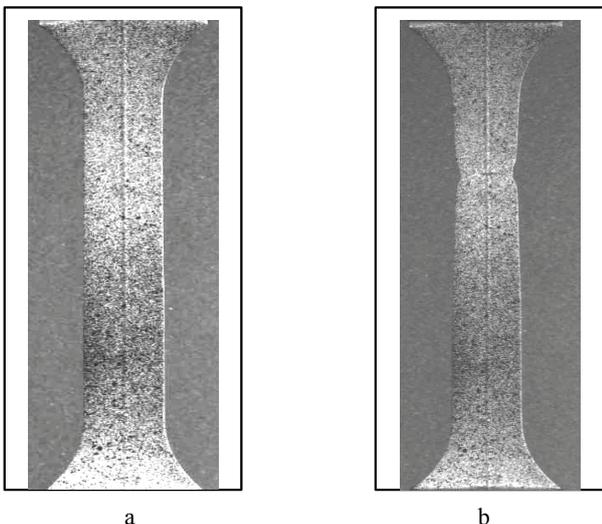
Parallel tested specimens: zone of necking and fracture.
